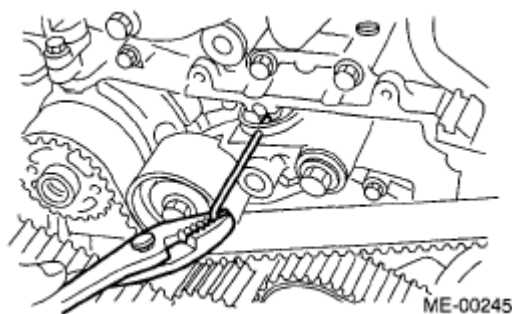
Removing Stopper Pin From Belt Tension Adjuster
